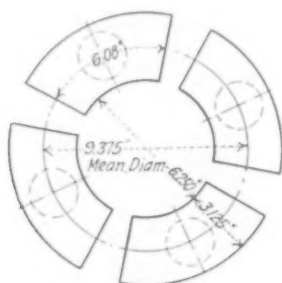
ARRANGEMENT OF SHOES IN THE THRUST BEARING TESTED
